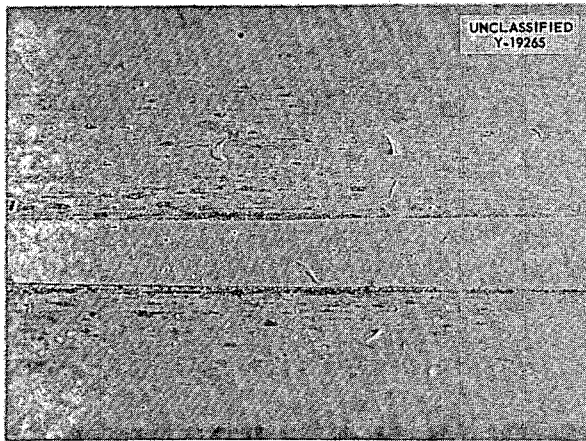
Macrograph of the Inside Surface of Weld-drawn Tubing.
